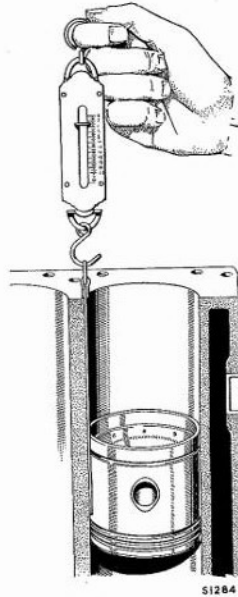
Checking the piston clearance in the cylinder bore, using a feeler gauge and spring balance
